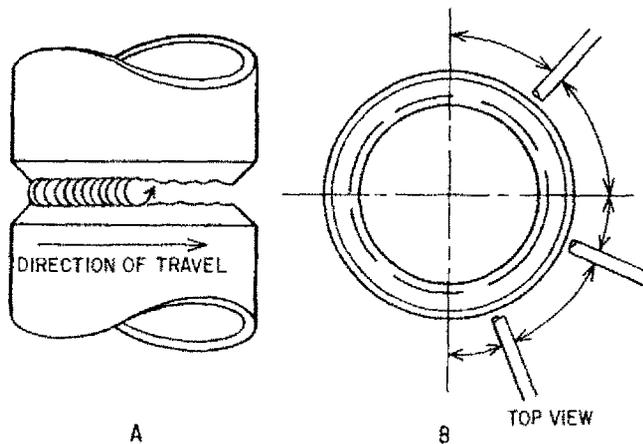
A. U-weave used to weld a horizontal root bead when the root opening is too wide. B. Top view of electrode angle used when welding with a U-weave.
